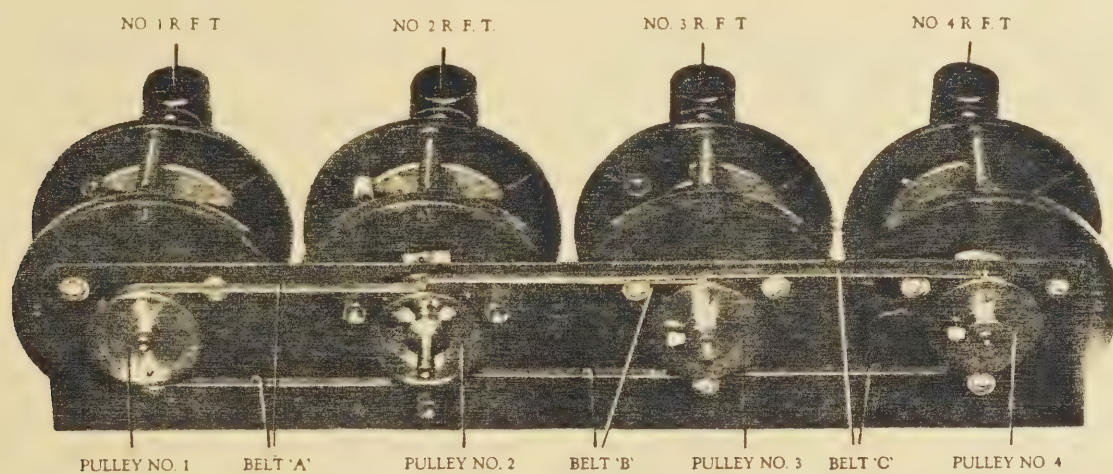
FRONT VIEW OF MODEL 32 SUB-PANEL ASSEMBLY. The same arrangement of pulleys and belts is used on Models 33, 36 and 49, except that the dial-condenser pulley is usually placed with the hollow side toward the condenser.
